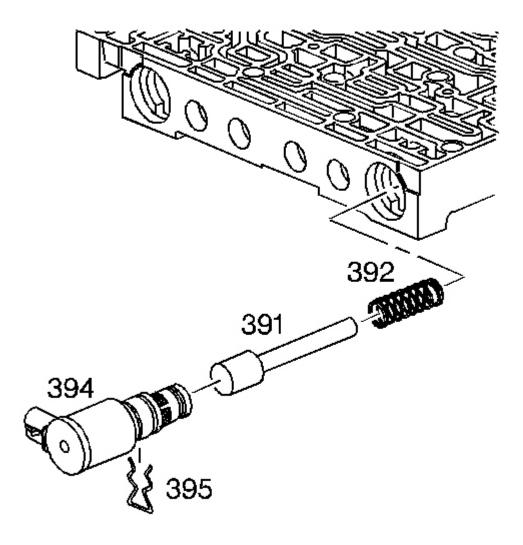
View Of 3-2 Control Solenoid & 3-2 Control Valve Courtesy of GENERAL MOTORS CORP.
